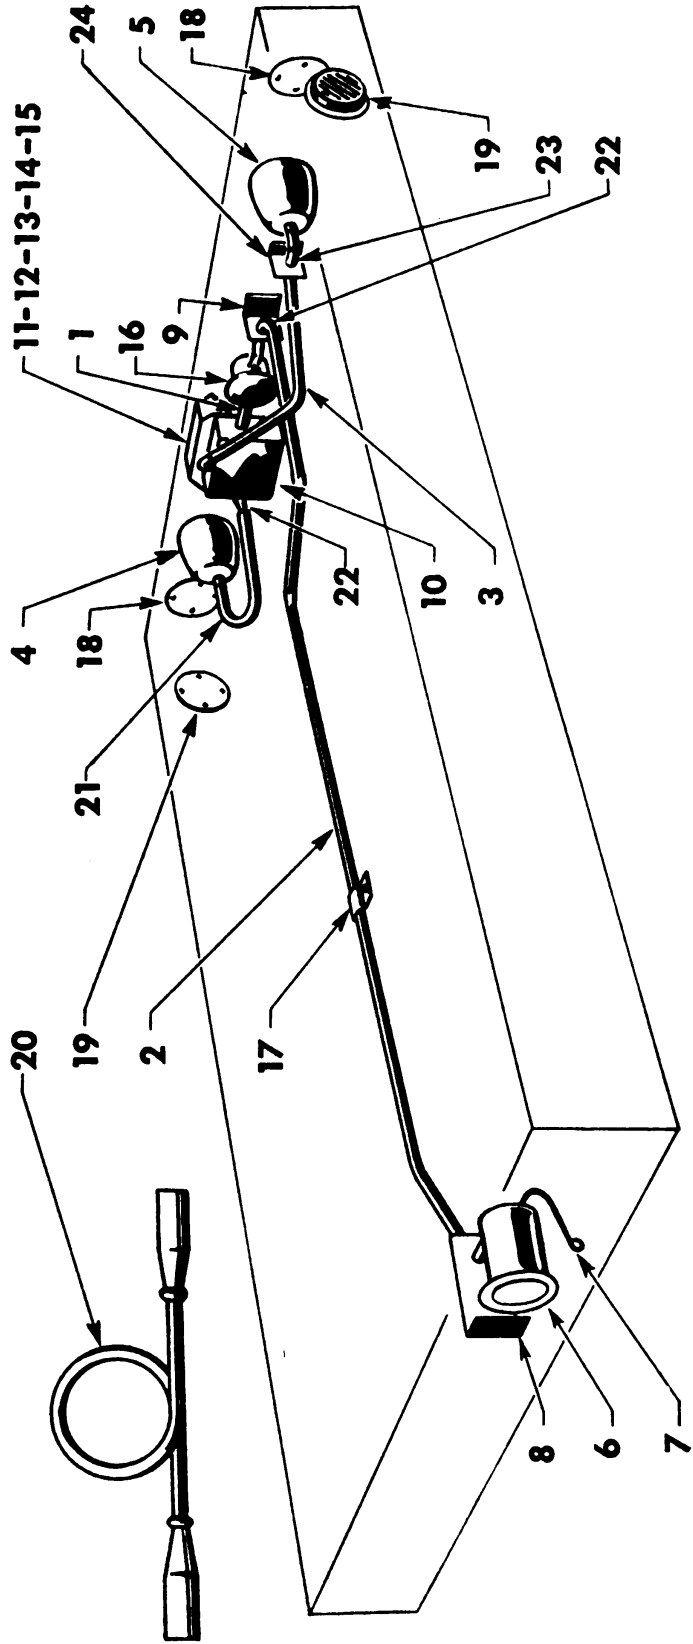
WIRING AND LIGHTS—CONVERTER GEAR
